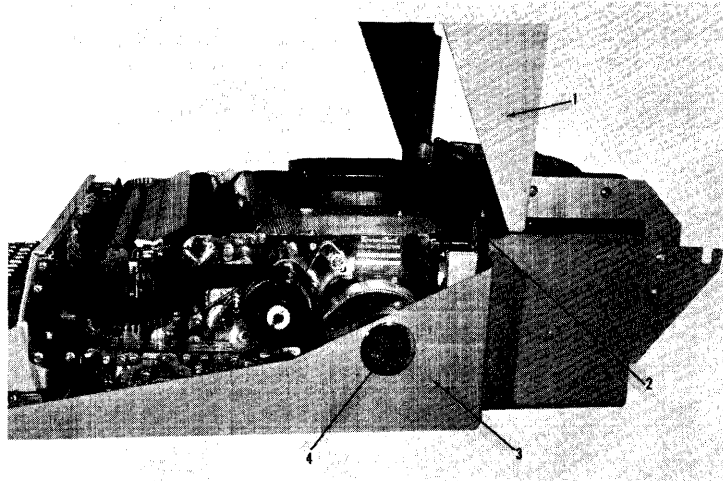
Top-Bottom Cover Assembly, TermiNet 1200 Printer
